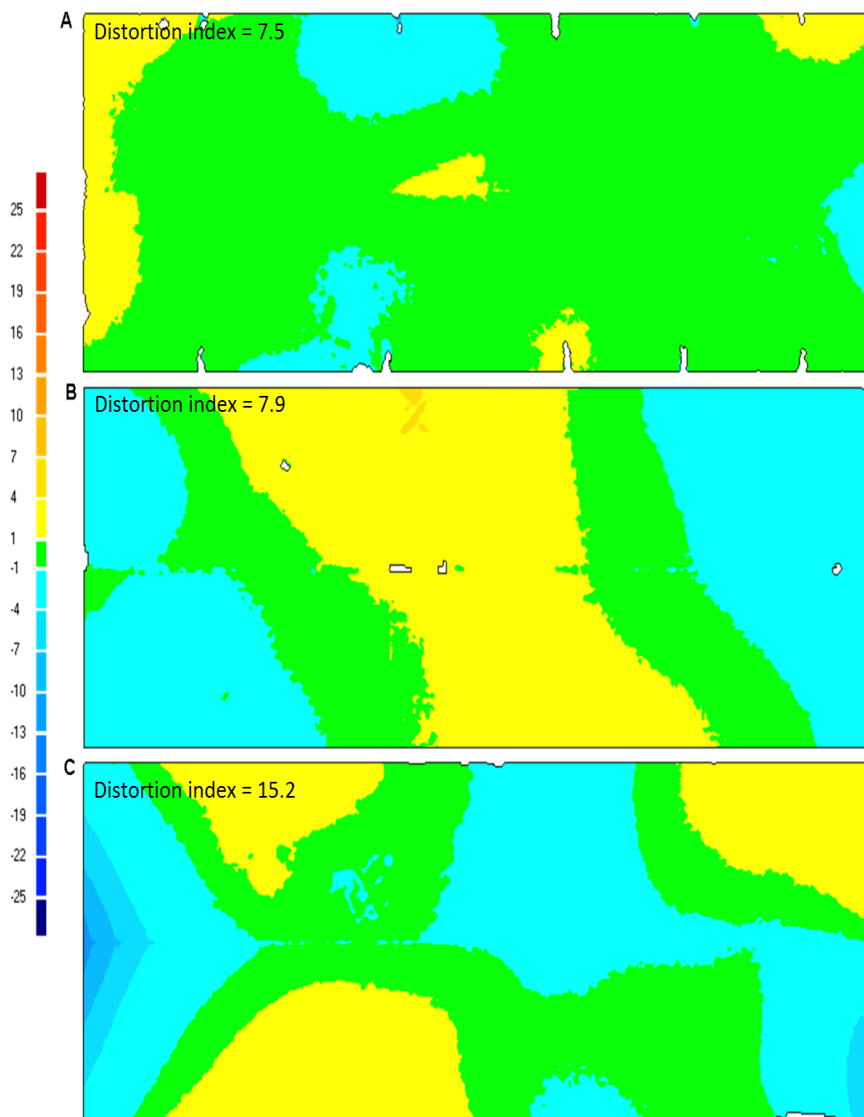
The out-of-plane deformation of AH36 plate for several stages of production in test 6: (a) the initial deformation after tack welding, (b) the out-of-plane deformation after side heating during welding of the first pass and (c) the final out-of-plane deformation after conventional welding of the second pass (without side heating). The scale is -25 mm to +25mm.
